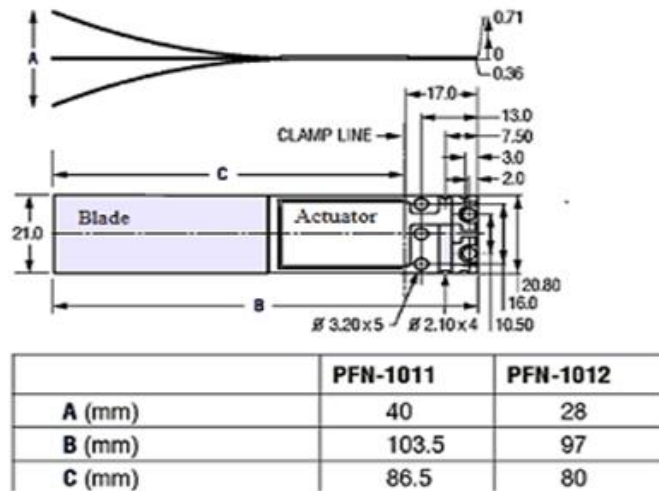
Piezoelectric fan dimensions, all dimensions are in (mm).
